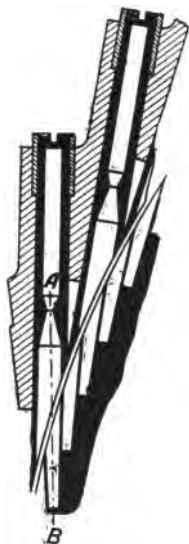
Nozzles and Buckets of Stumpf Steam Turbine.
